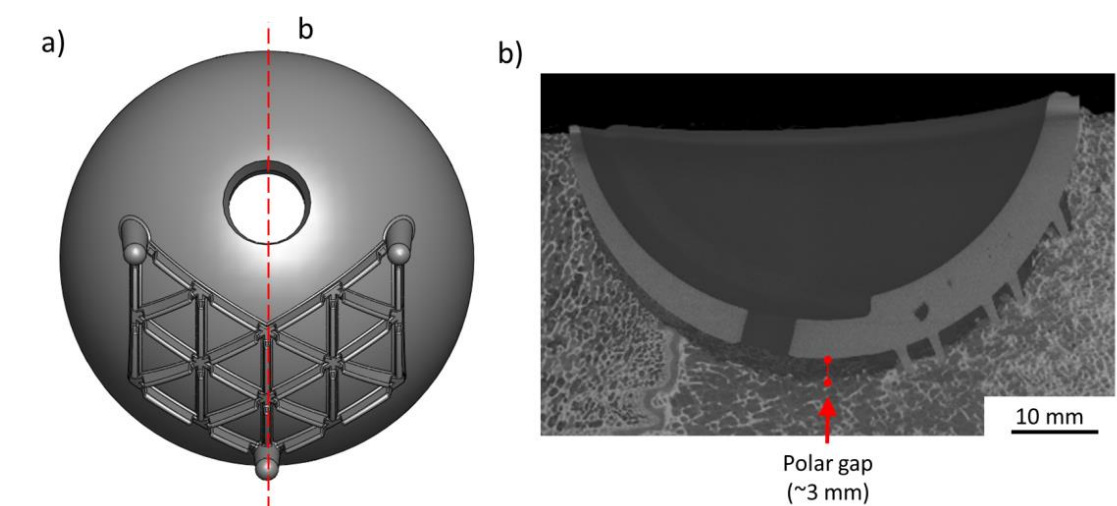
a) Model of injection moulded CFRPEEK component with backing features, b) cross section taken through the centre of the implanted component showing the polar gap.
